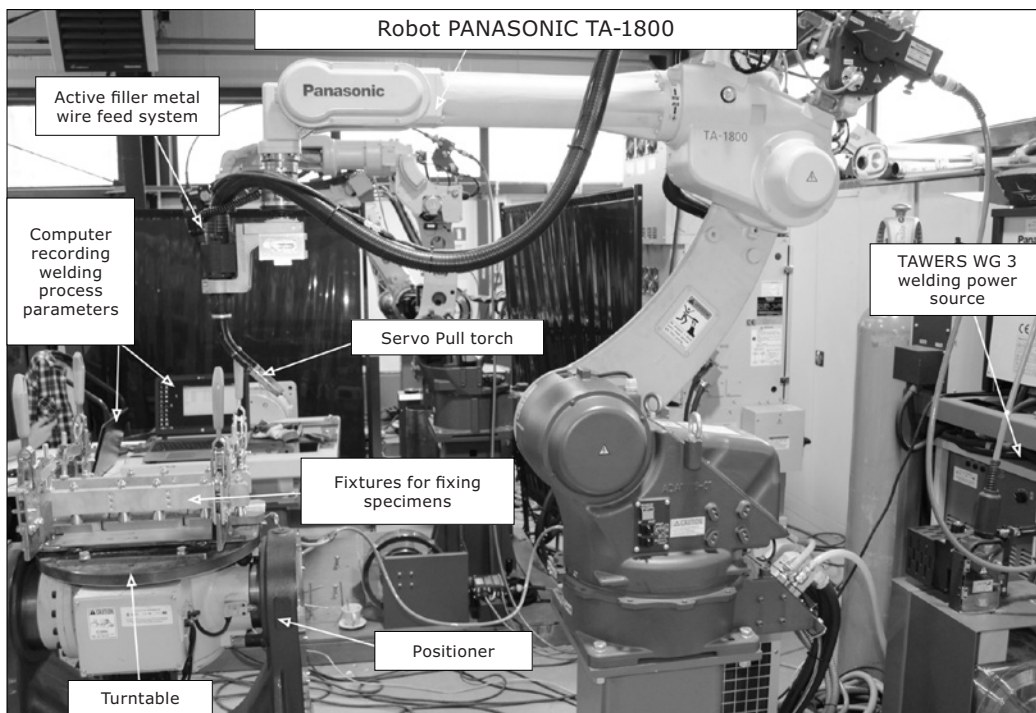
Robotic testing station equipped with the TAWERS welding system
